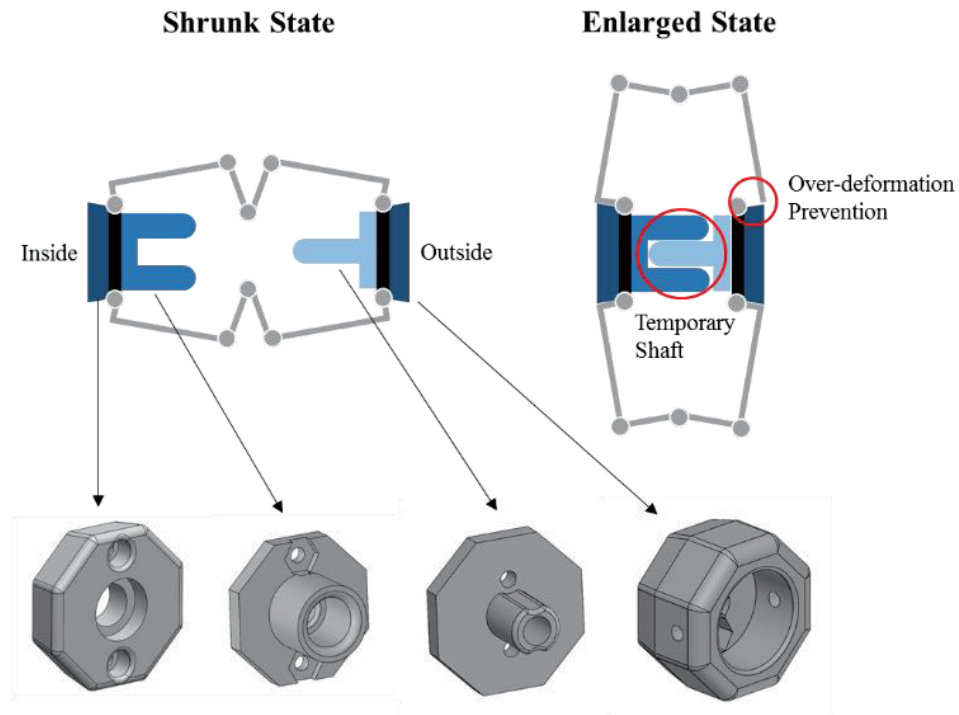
Wheel hub design for the axis misalignment problem.
